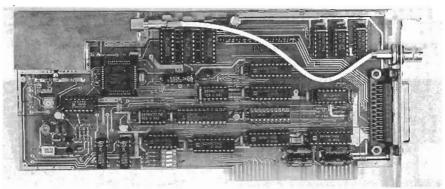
THE FINISHED PC10 BOARD. Notice how the brass RF shield goes in place over the input section of the board.
